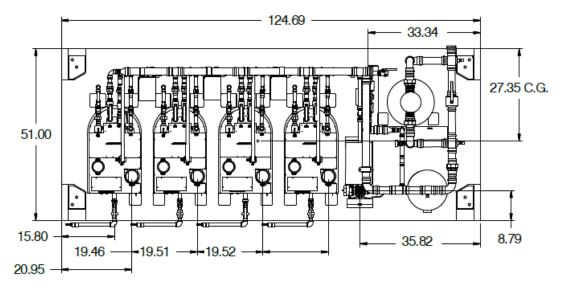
LC-N-800-4 Dimensional Drawing – Overhead View
